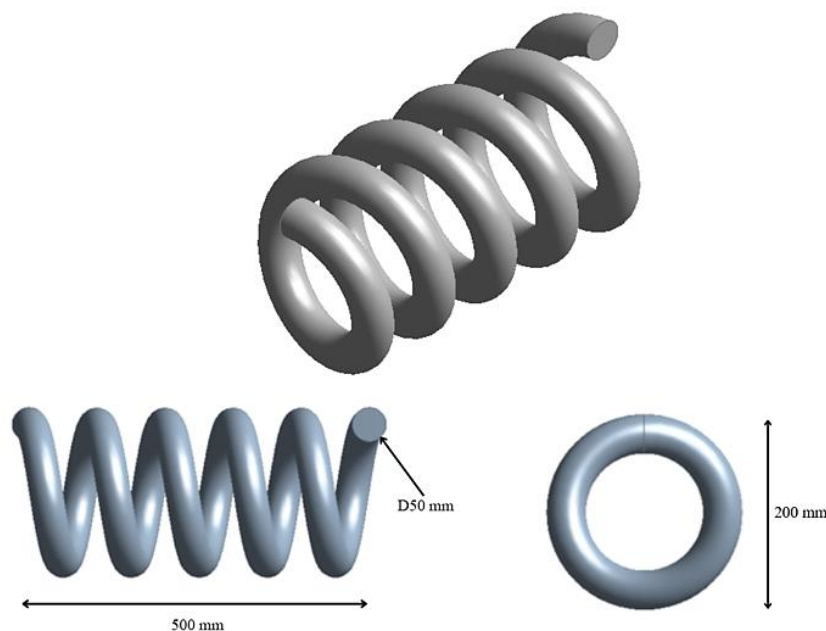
3D drawing of helical coil using ANSYS design modeler
